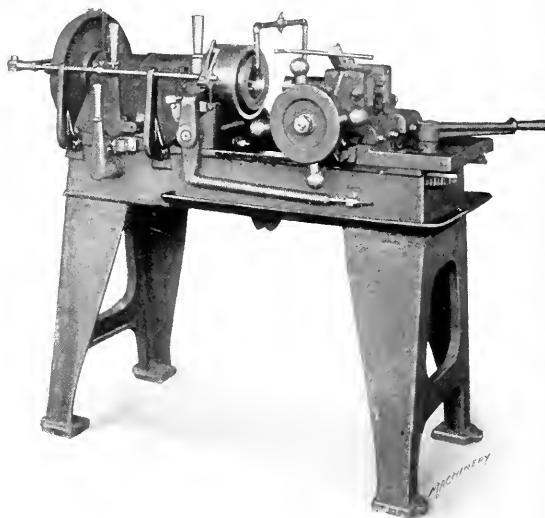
Opposite Side of Machine showing Vise Support and Two-speed Drive
